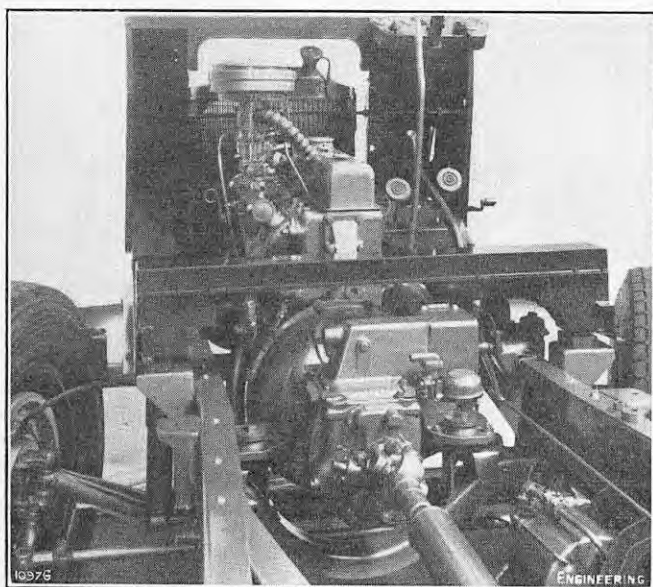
REAR ENGINE SUPPORTS; MORRIS 5-TON CHASSIS.
